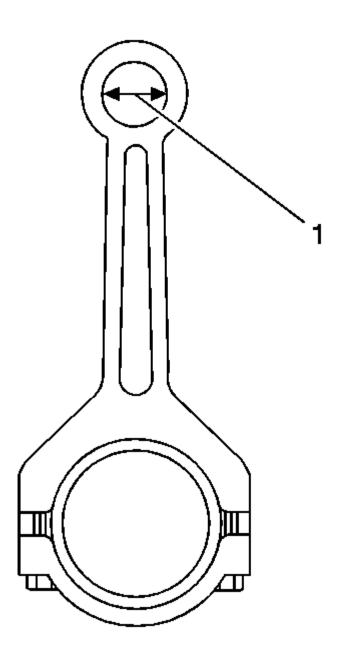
Measuring Connecting Rod Pin Bore Inside Diameter Courtesy of GENERAL MOTORS CORP.
